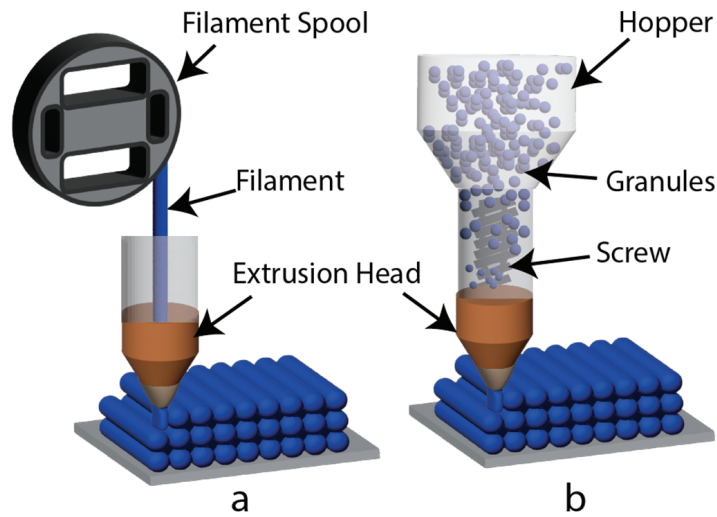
Illustration of Additive Manufacturing Techniques: (a) Fused Filament Fabrication and (b) Fused Granule Fabrication.
